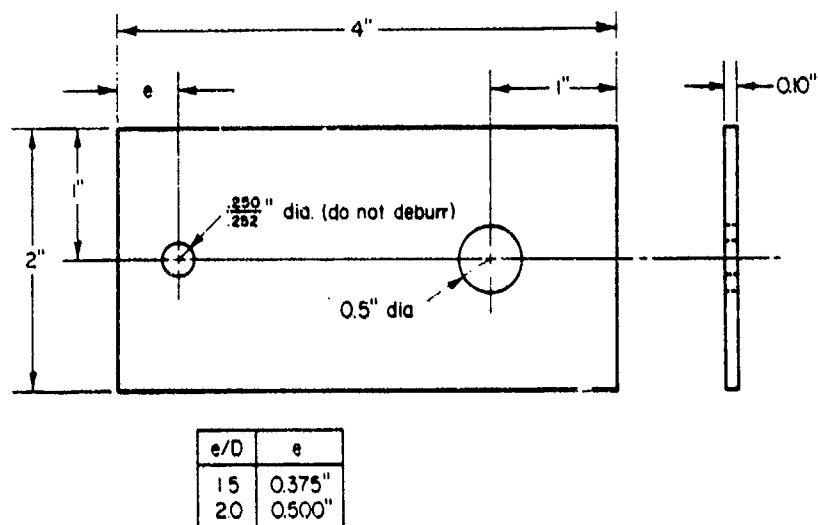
Bearing specimen for 7149-T73 hand forging.
